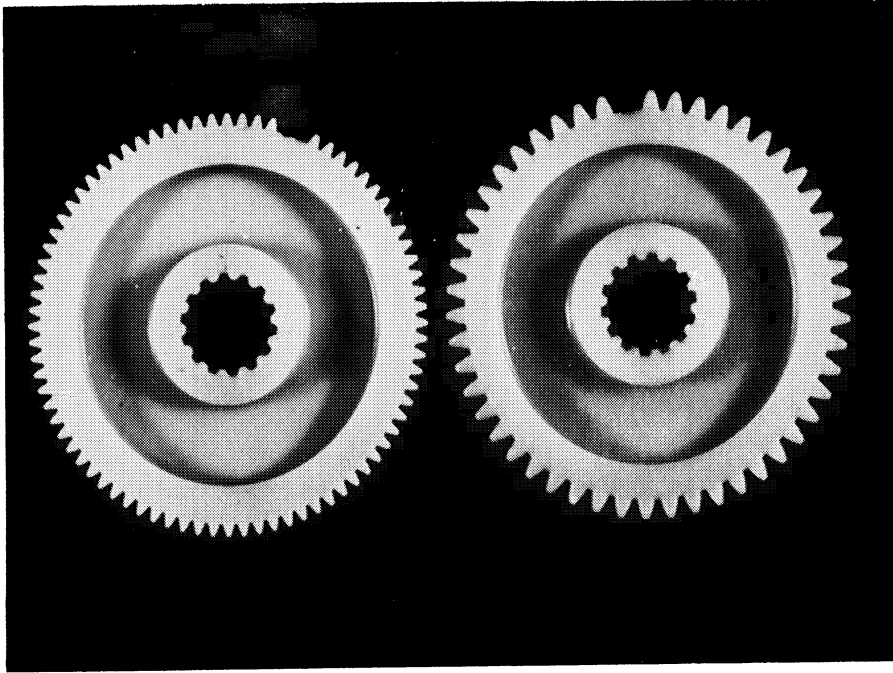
Fatigue failure of molded DELRIN gear.
